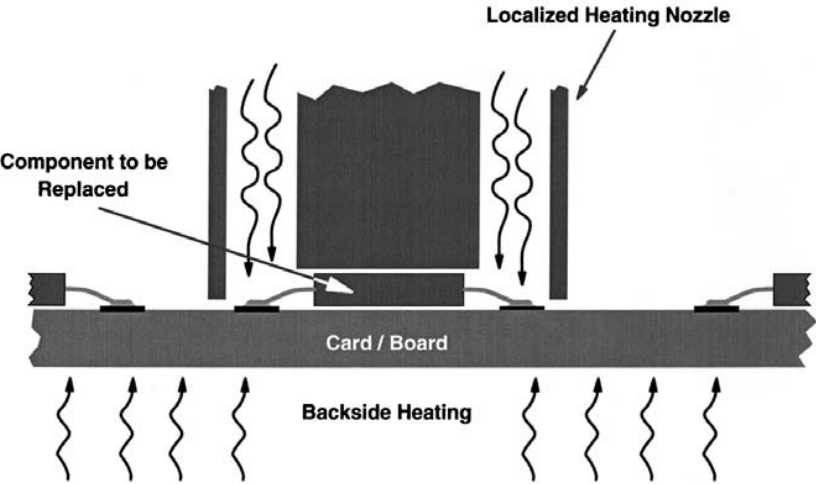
Illustration depicting the replacement of a component attached to a printed circuit board (PCB) utilizing a localized heating technique.
